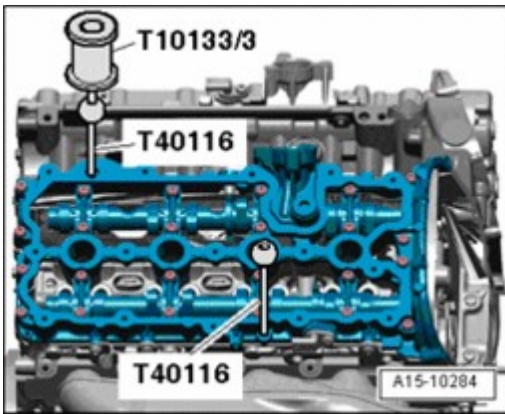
Removing Guide Frame Securing Pins T40116 With Impact Puller T10133/3
